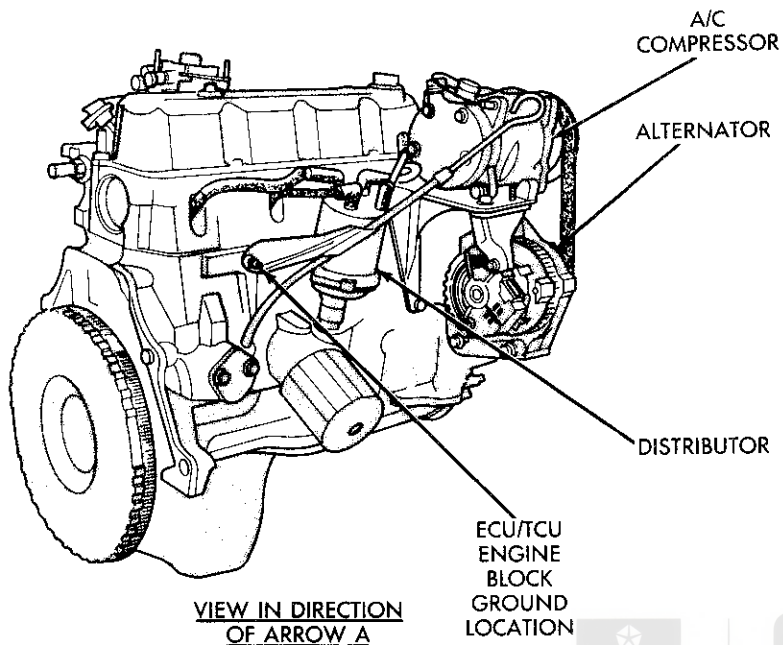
Engine Wiring 2.5L Engine — MJ, XJ
